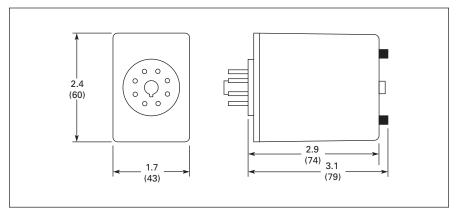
D85 Series — Approximate Dimensions in Inches (mm)
